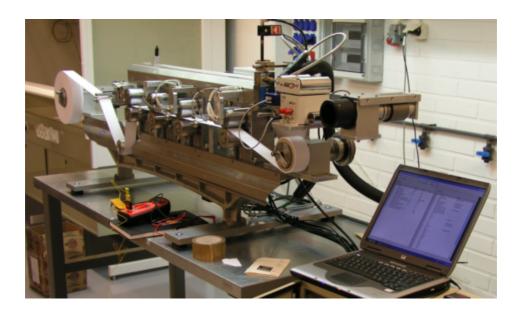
Roll-to-roll imprinter machine. The roll diameters are 66 mm and the total device length is ca. 2 m. The rotation speeds of the different rolls can be synchronized by computer and continuous processing is possible (Paper VI).
